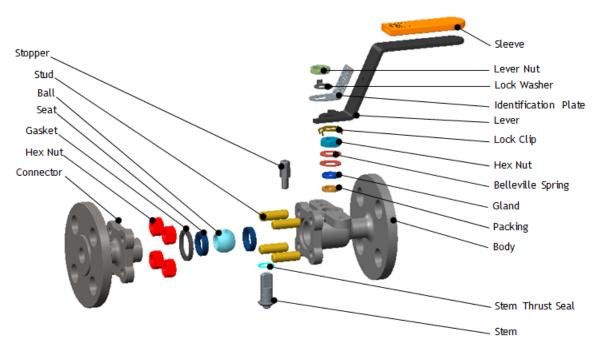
Two Piece Ball Valves - Lever Operated (DN15 FB - DN50 FB)
